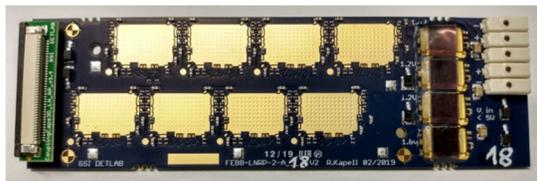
Front-end board equipped with passive components and connectors, ready for being used during module assembly.
